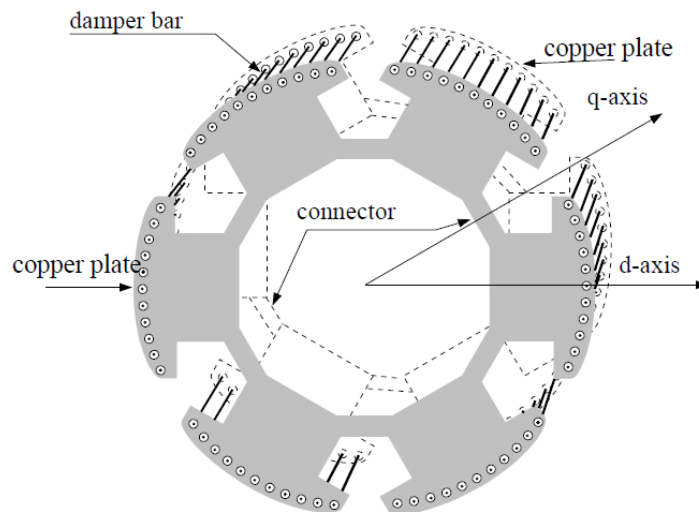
Example of a classical damper winding for a 6 pole salient pole machine [15].
